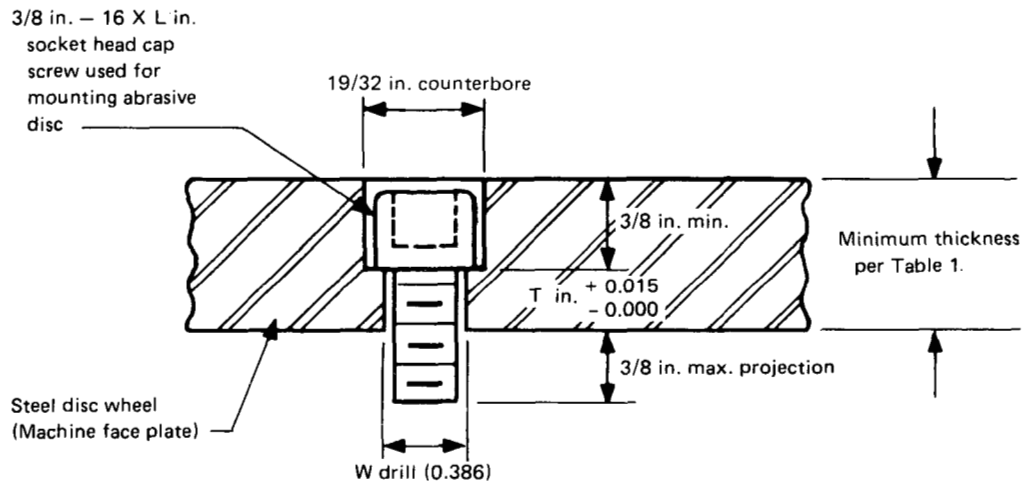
DETAIL OF MOUNTING HOLE AND SCREW FOR INSERTED NUT TYPE MOUNTING
